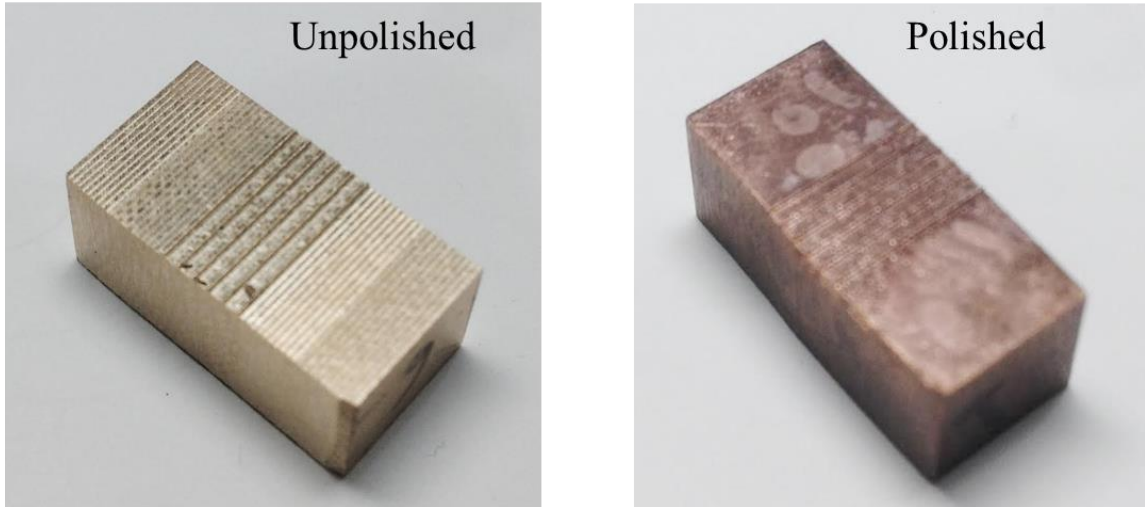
After polishing, the part became smoother. The machine marks were removed while keeping the microchannels intact.
